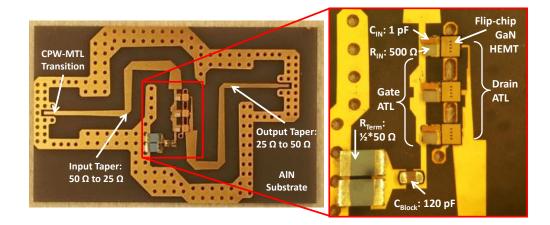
Fabricated hybrid distributed power amplifier with assembly detail
